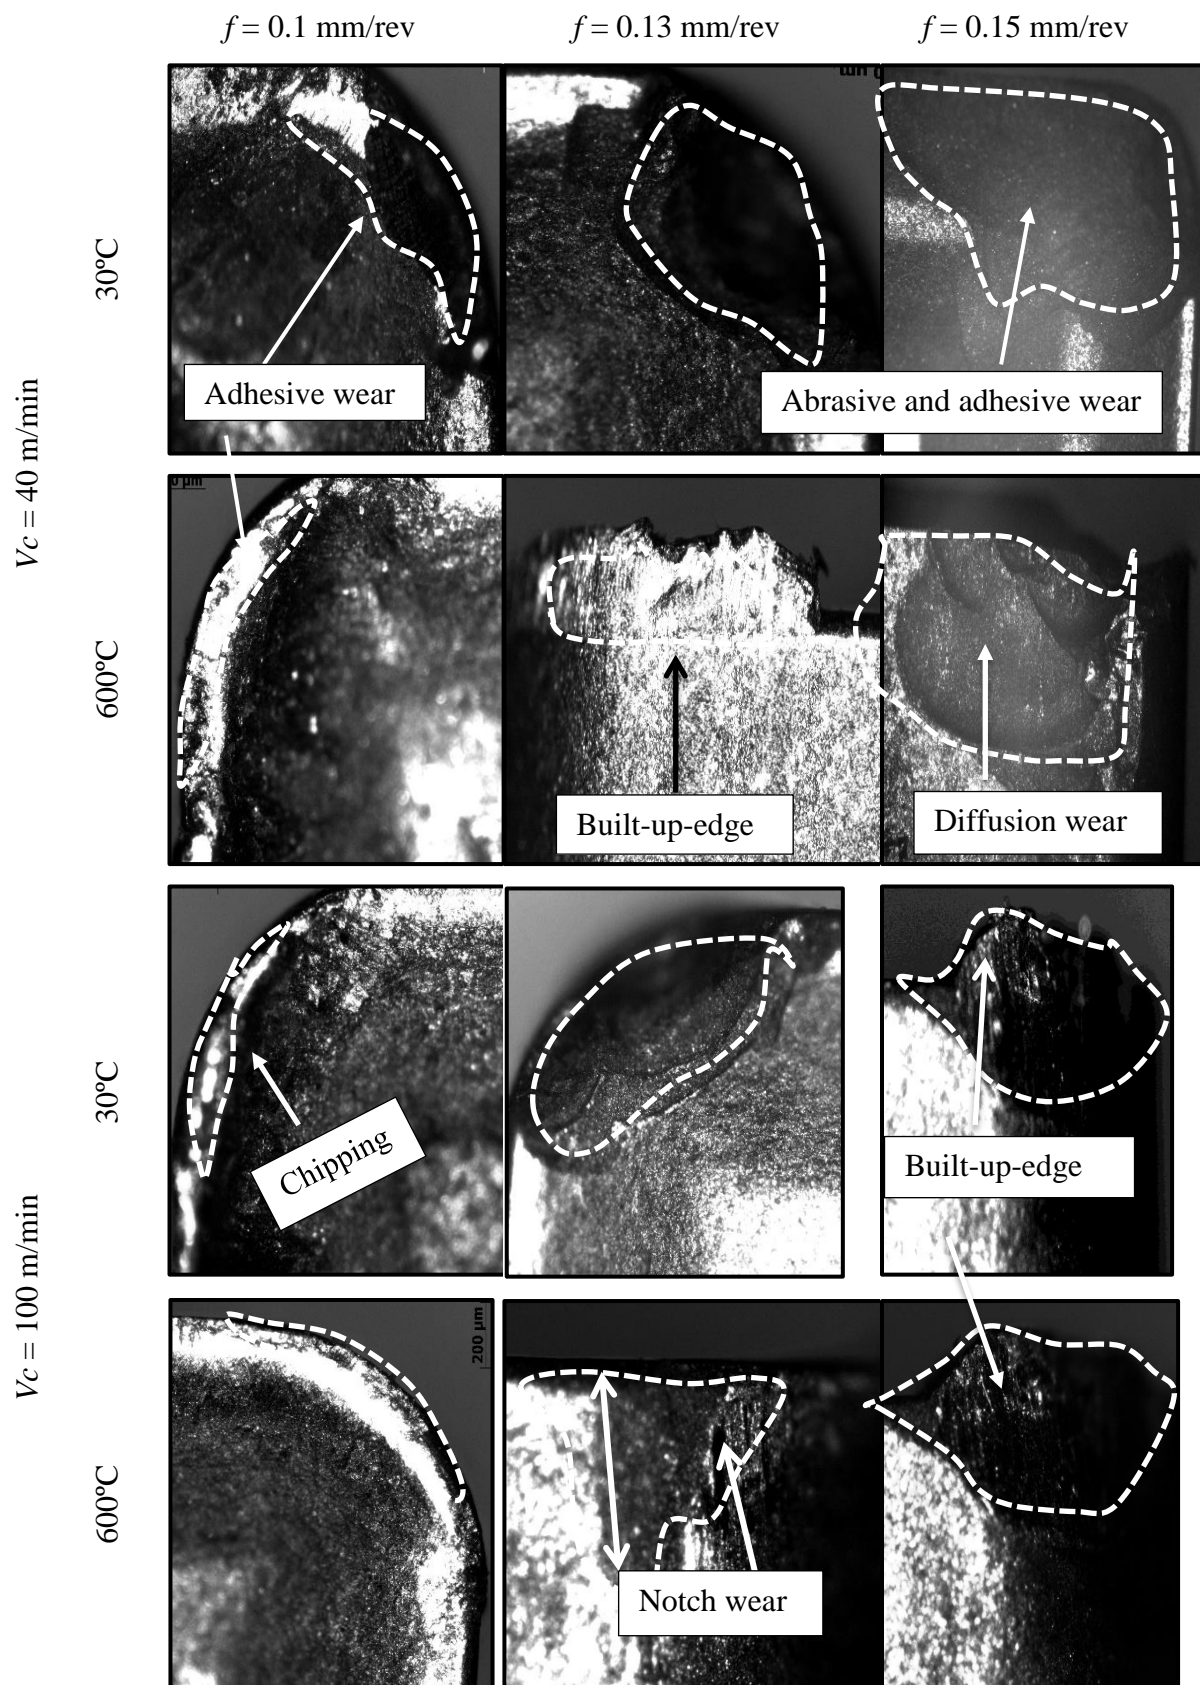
Tool wear at different cutting condition in machining Inconel 625
